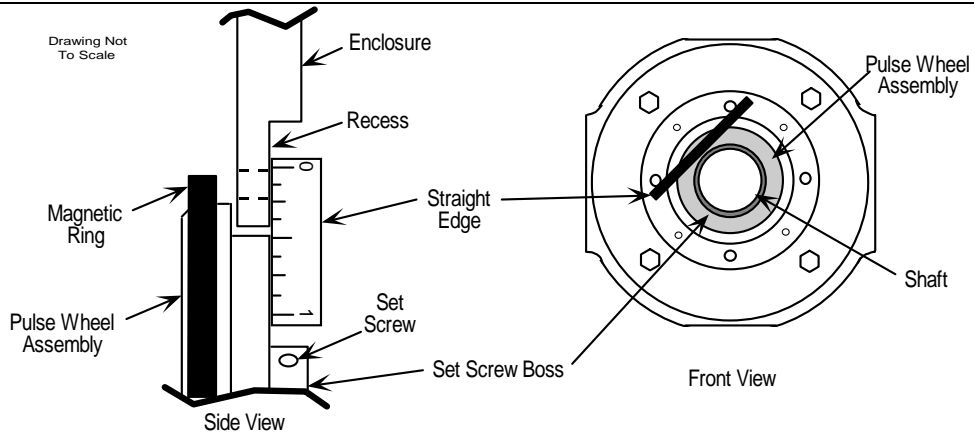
Pulse Wheel Alignment Check Using Straight Edge
